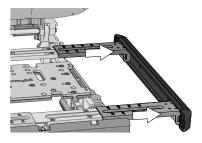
The brackets can be wedged if you do not pull out both simultaneously.
